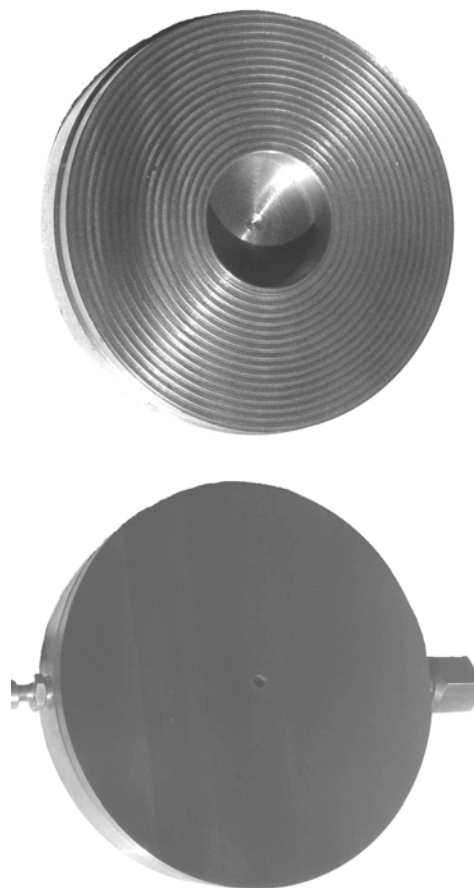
Pictures of the grooved (top) and seal (bottom) plates
